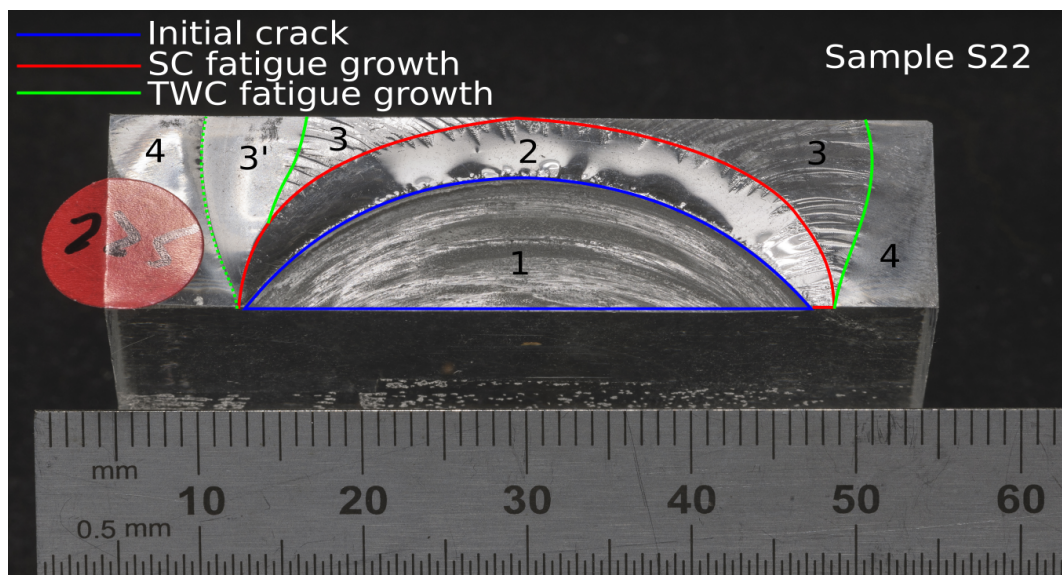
Test on Perspex plate - Fracture surface - Sample S22
